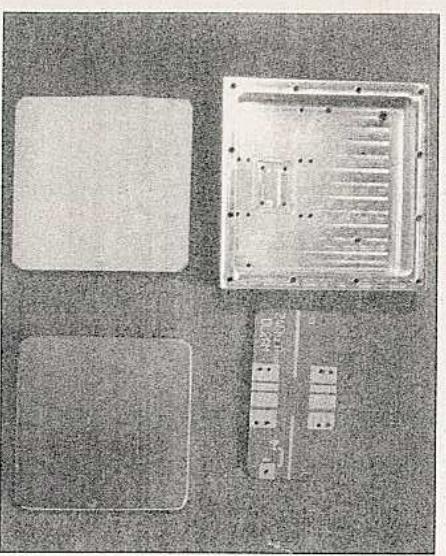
Casing, PCB, silicone rubber and aluminium plates
